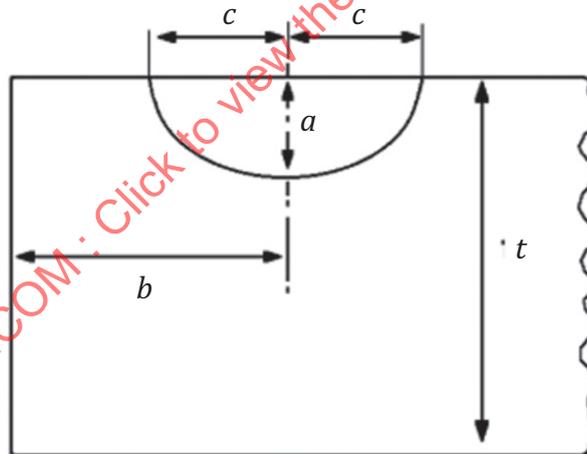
Dimensions of a surface crack, b = distance to nearest edge
